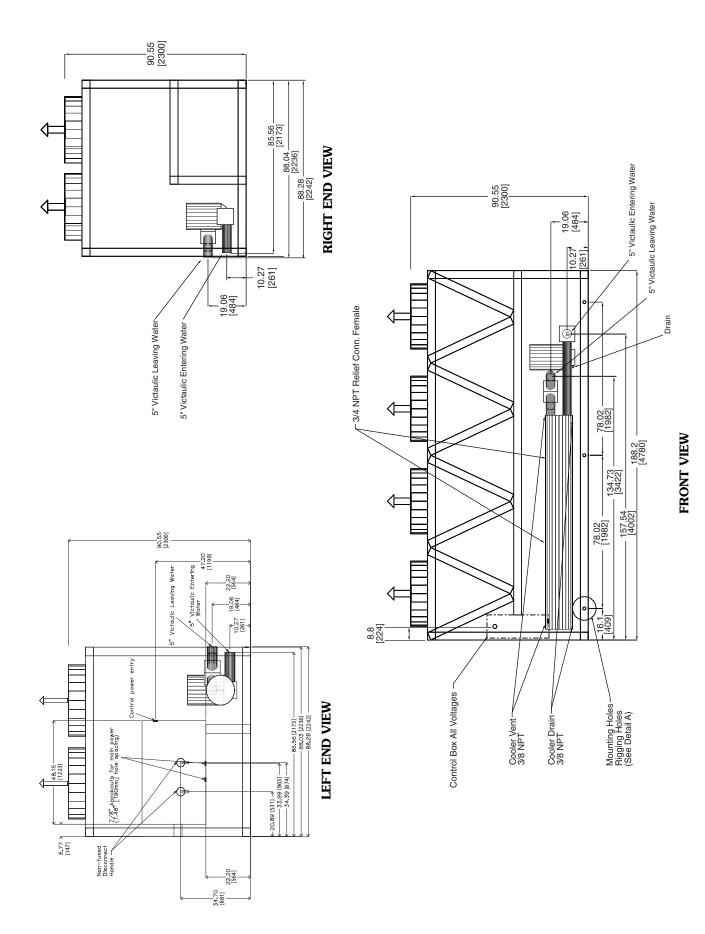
30XA090-120 Air-Cooled Liquid Chiller with Pump Dimensions (cont)
